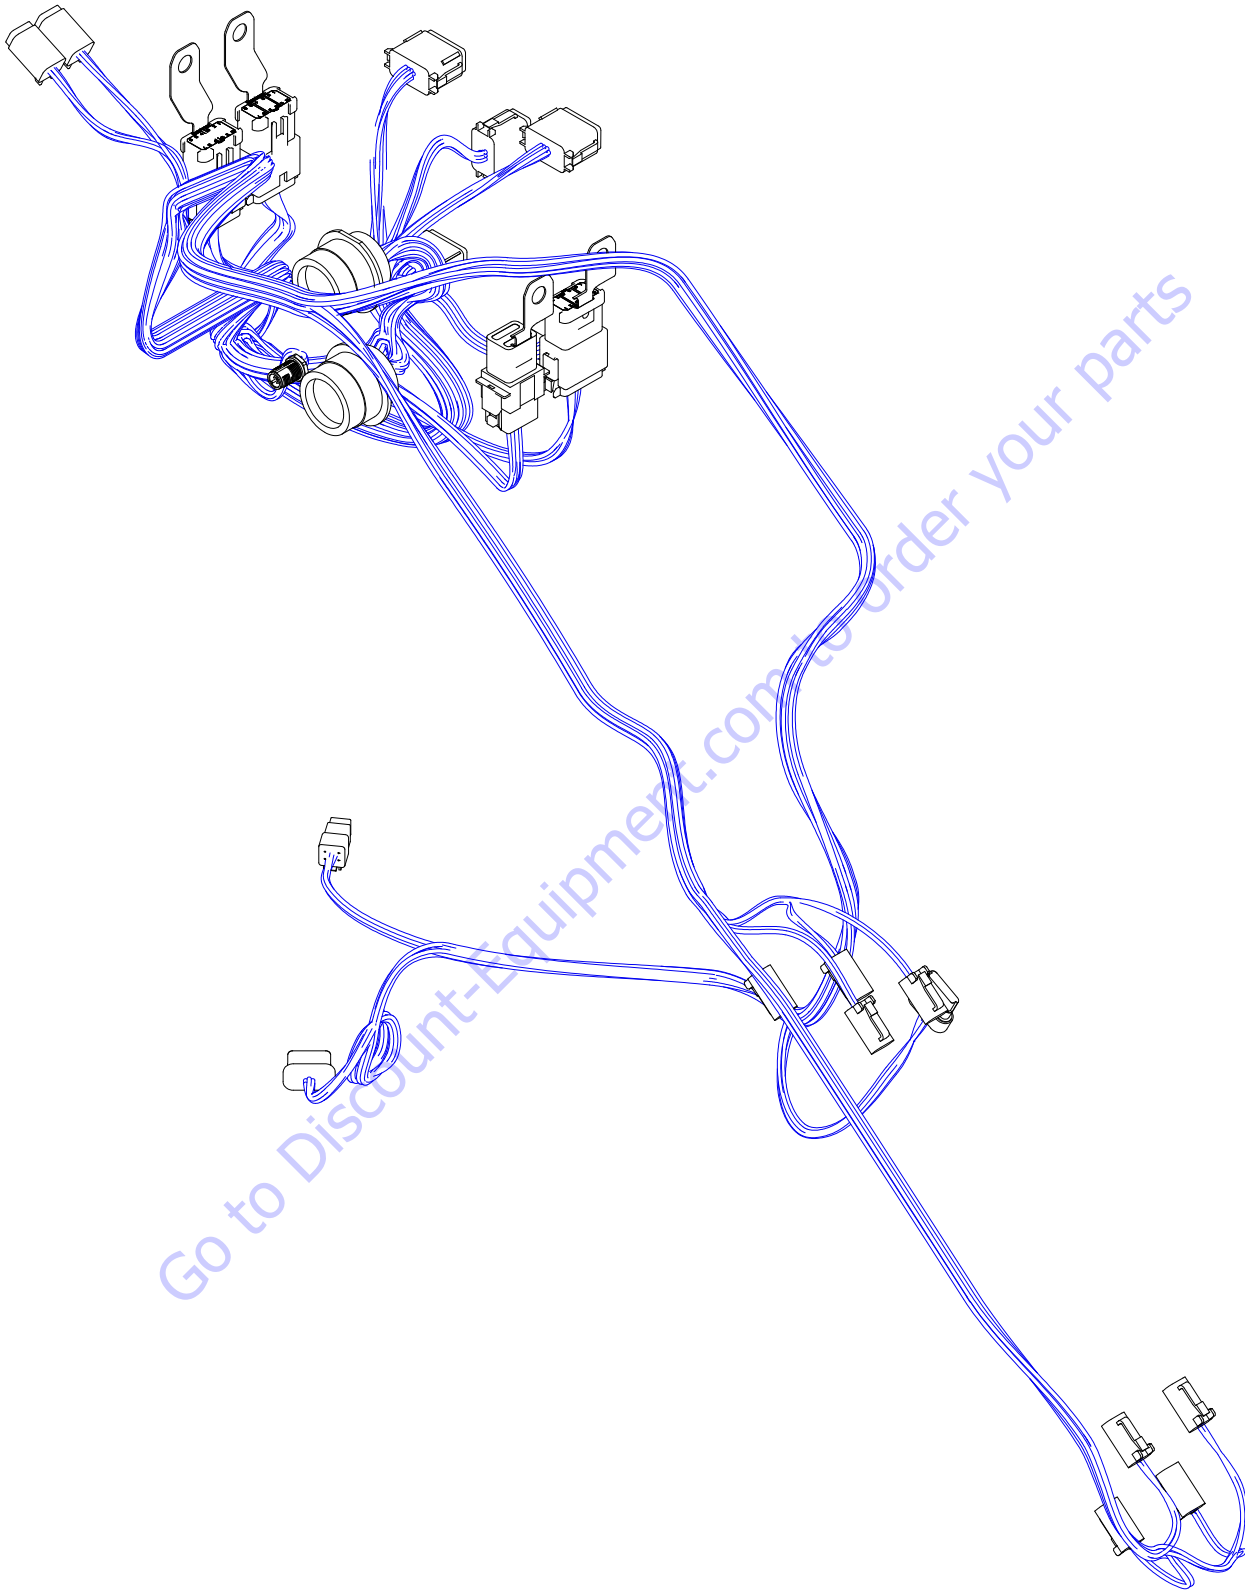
Jib Valve Harness - Sheet 1 of 3
